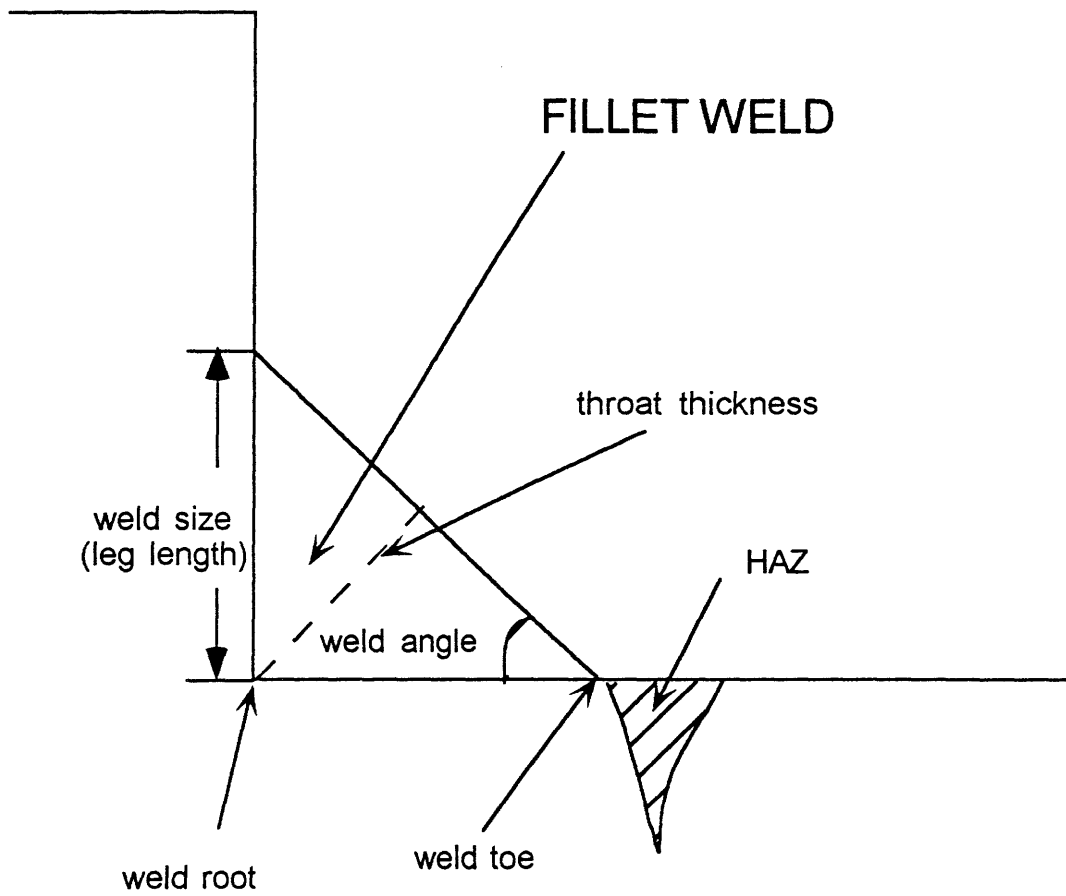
Geometry and definitions of fillet welds
